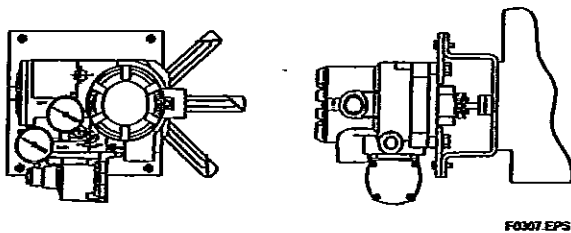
FVP Installed on Rotary-motion Valve/Actuator
